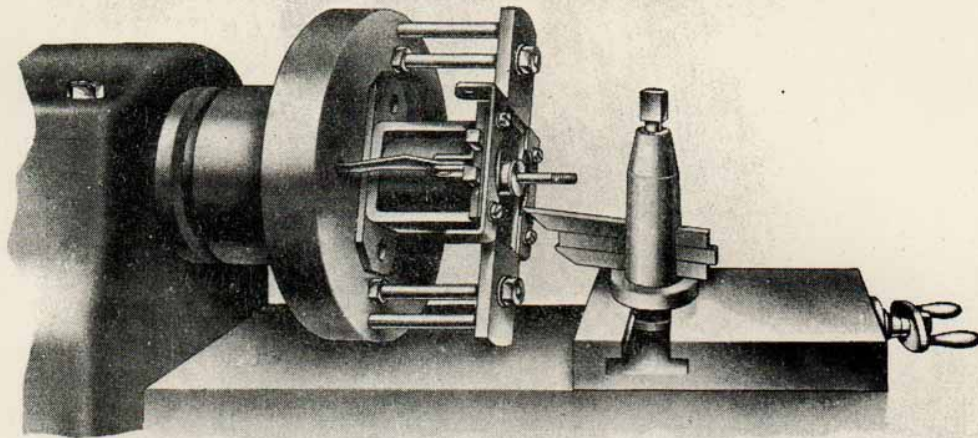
SIMPLE FIXTURE FOR HOLDING SWITCH IN LATHE.
